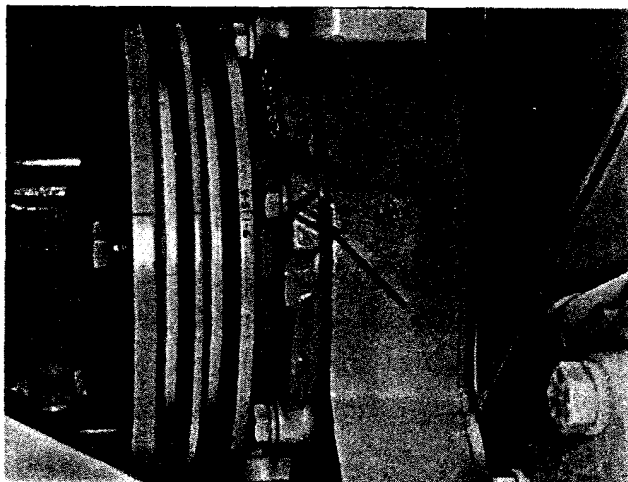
, (V514125). Valve set marks – V-903 Marine Engine
